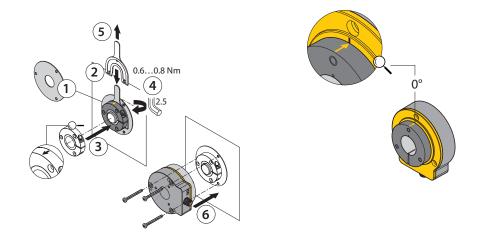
Front mounting — shaft diameters up to Fig. 6: Zero point default value 20 mm
